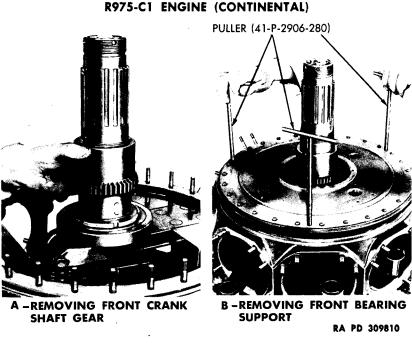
Removing Front Main Bearing Support and Crankshaft Gear
